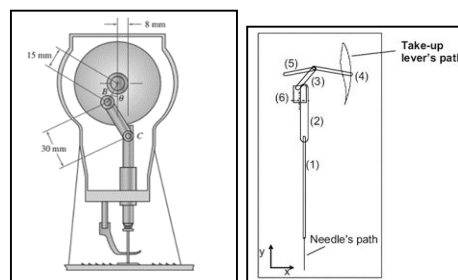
ADAMS modelling of sewing machine needle assembly [7]
